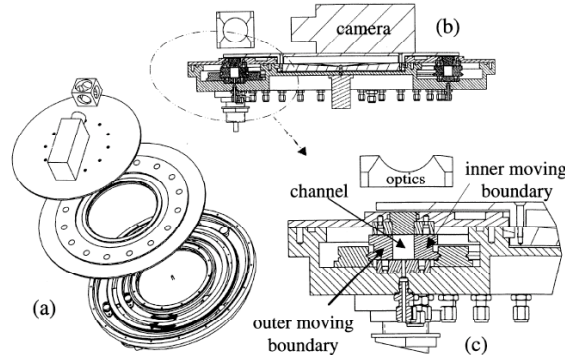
Sketch of the SiGMA flight shear cell. (a) Exploded view showing counter-rotation of inner and outer boundaries; (b) Cut with channel, camera, optics, pressure and gas distributors; (c) enlarged view.
